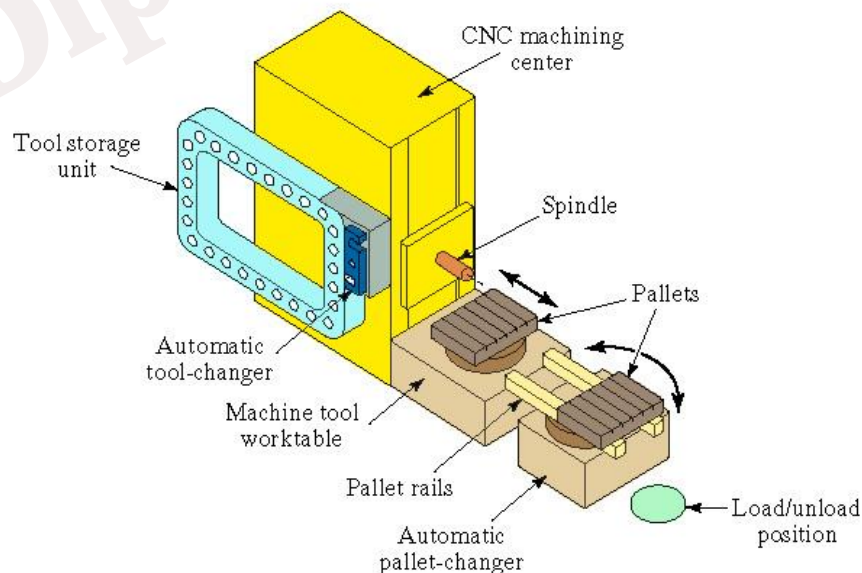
Automatic pallet changer integrated with a CNC machining center, set up for manual unloading and loading of work parts.
